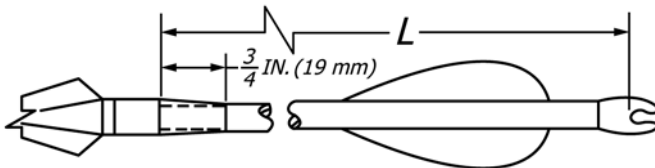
Arrow Assembly Incorporating an Outsert (See 2.1.2.3)
